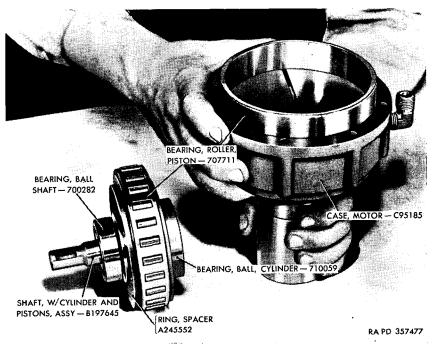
Removing outer roller bearing race from hydraulic motor case.
